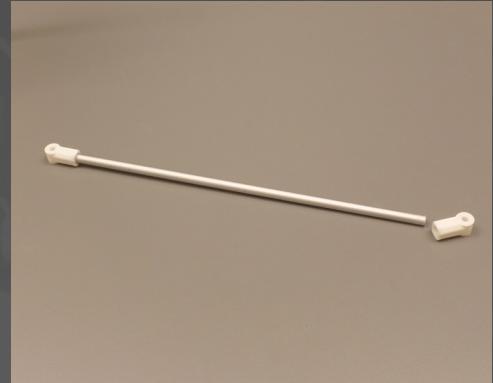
Assemble the 6mm rods, add glue if needed (but wait until you have assembled the whole arm and verified the functionality).
